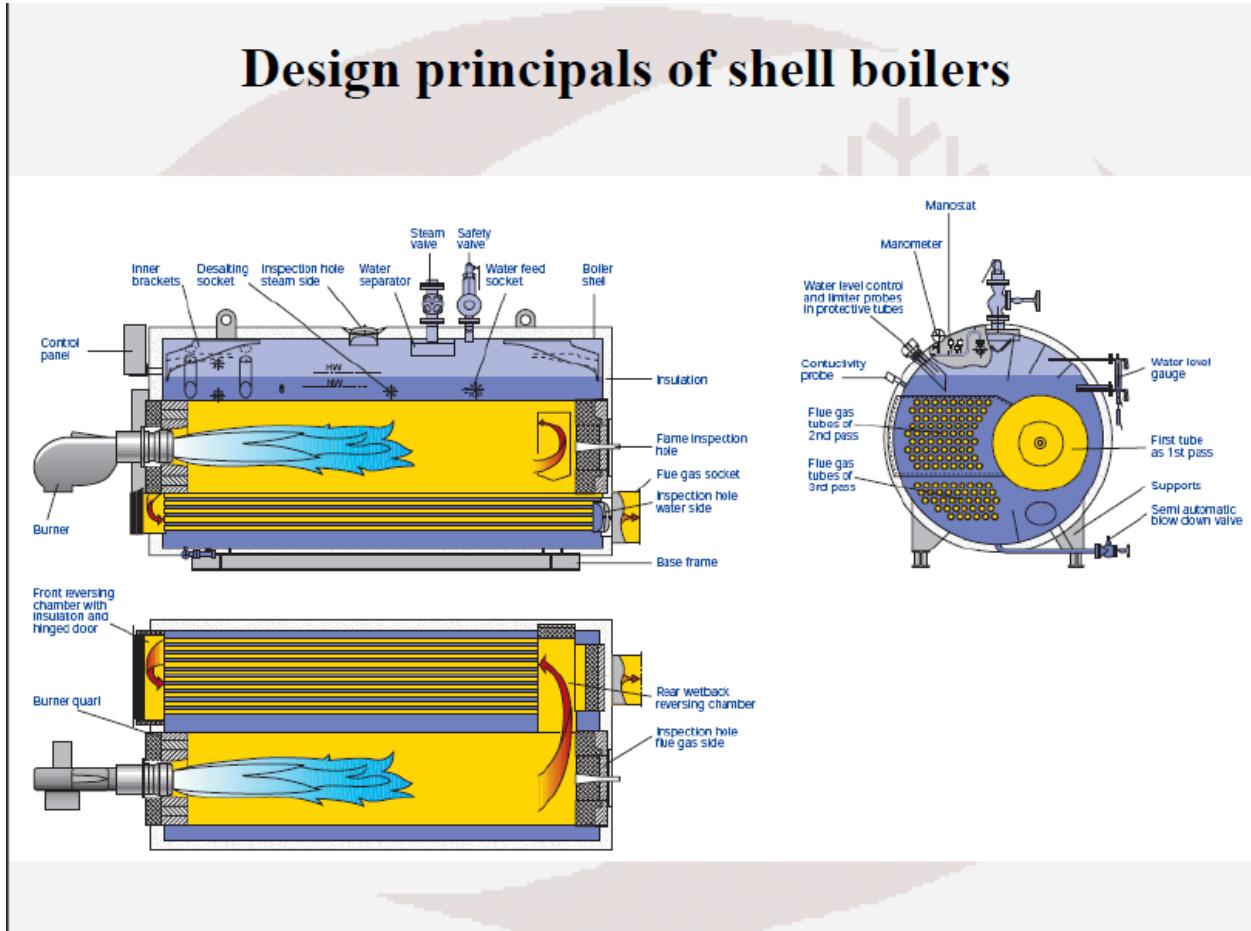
Typical design principles of shell boilers, highlighting furnace, passes, drum and auxiliary equipment.
